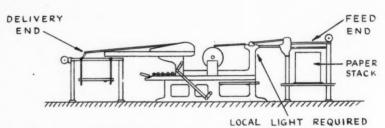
Typical lighting arrangement over high-speed Miehle machine.
